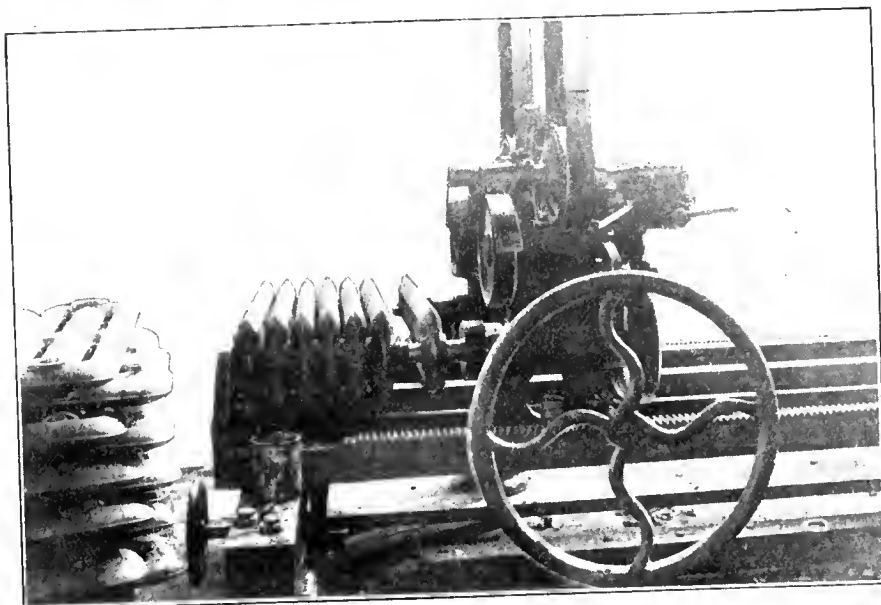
RADIATOR ASSEMBLING MACHINE.
